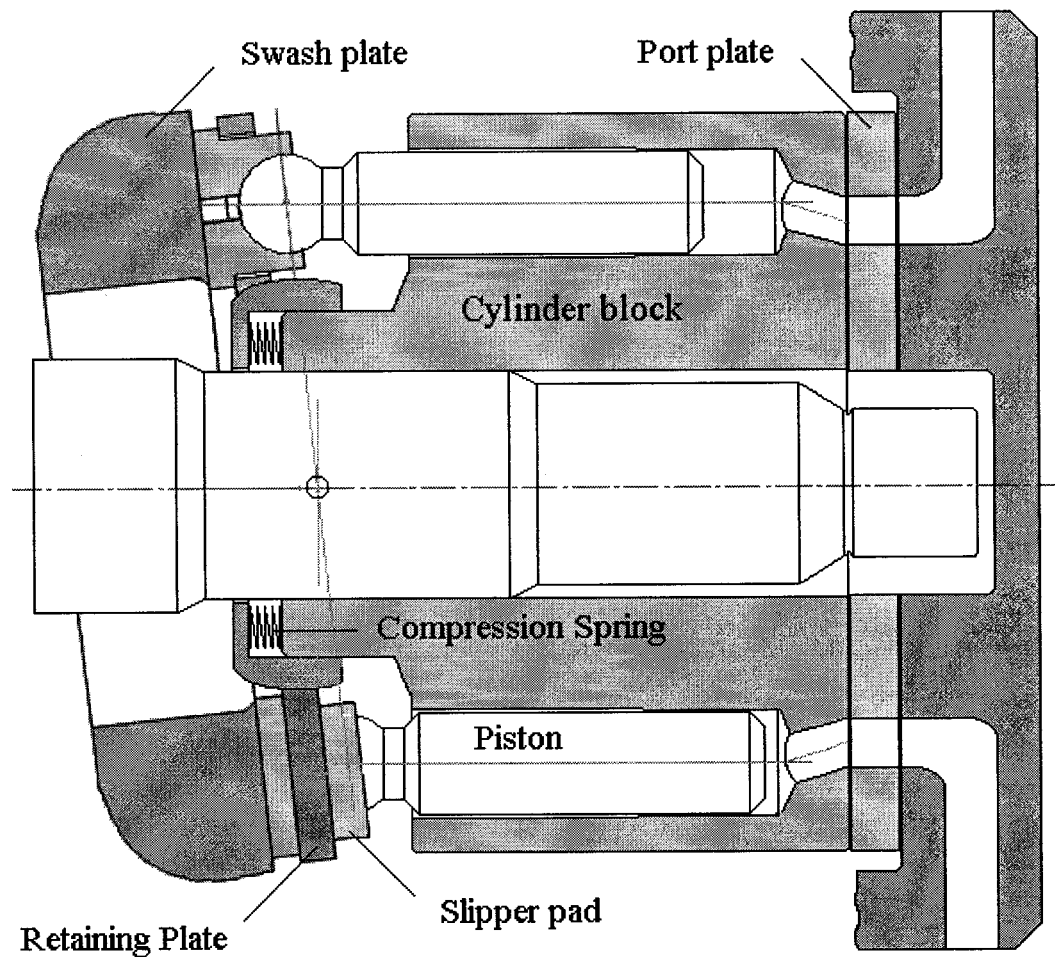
Swash plate axial piston pump with cylindrical cylinder block
